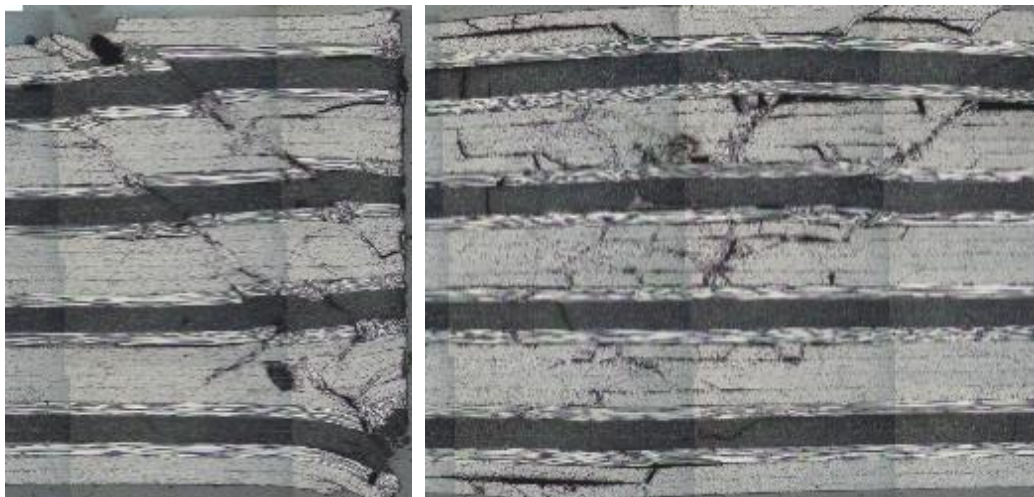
Fractography images of bearing plane (left) and net-section plane (right) of a double shear composite-aluminium joint.
